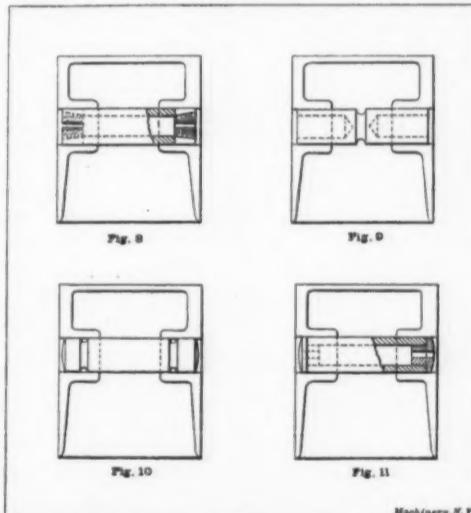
Hollow pin held by expanding plugs. Fig. 9.—Pin with circular retaining groove. Fig. 10.—Circular grooves in end of pin.
